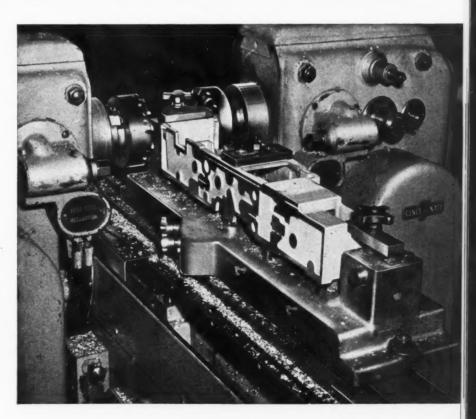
In this straddle milling set-up — the first of three such operations — bosses on two of the long sides of the cast-aluminum machine base are finish-machined. The same machine, equipped with another fixture, mills the other two long faces of the casting. In a third set-up on another machine, bosses on the ends of the casting are straddle-milled
